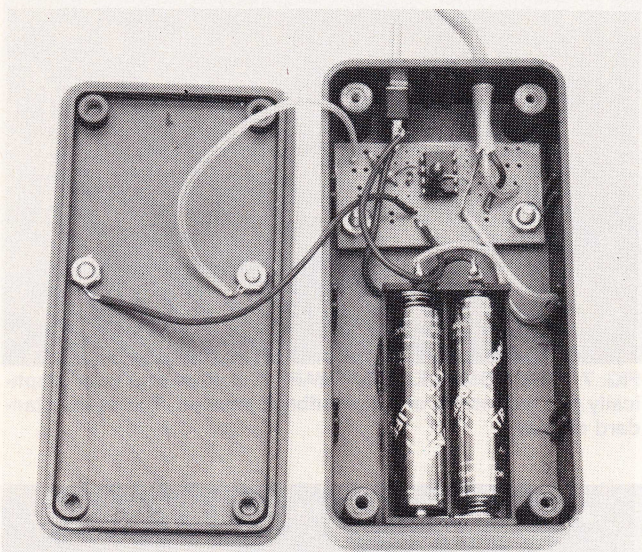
THE COMPLETED PROTOTYPE. Notice how the wires to the foil strips simply connect to the screws that pass through the cover.
